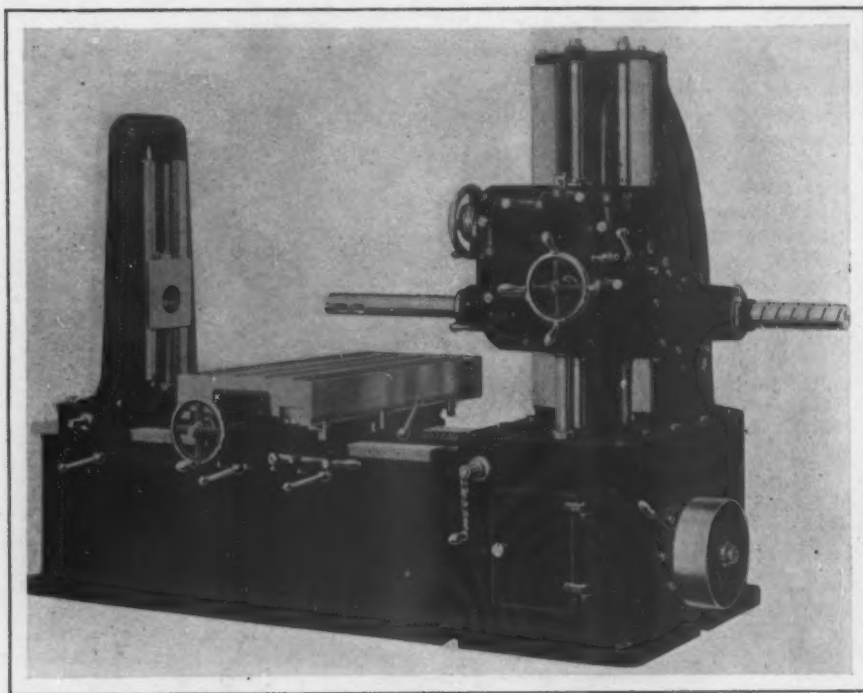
The New Table Type Horizontal Boring, Drilling, Milling and Tapping Machine Built by the Rochester Boring Machine Company, Rochester, N. Y.
